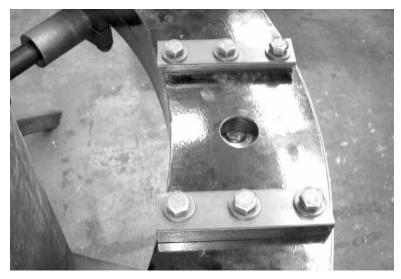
Install the slide mounting blocks on the rotating ring. Leave the mounting bolts loose.
